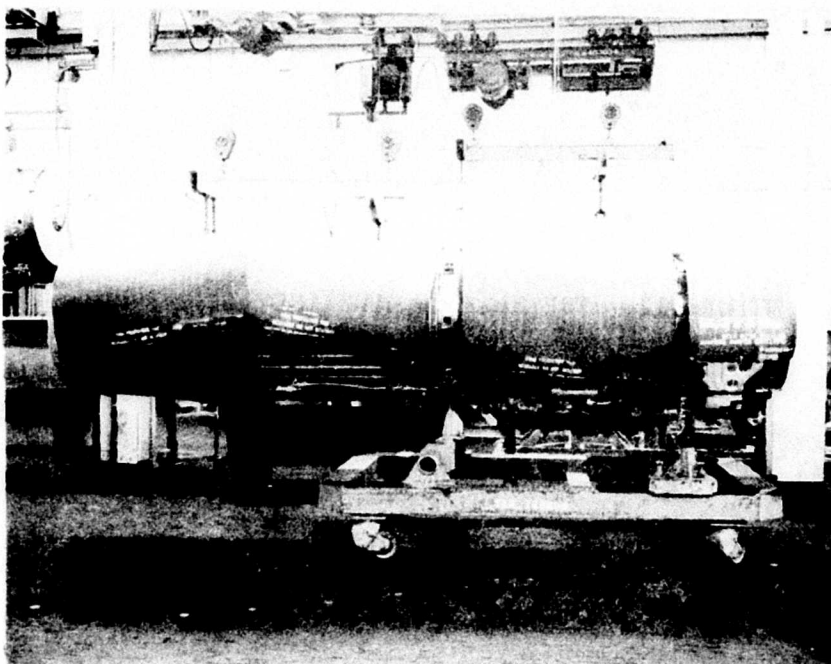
POLYETHYLENE FOAM SHEETS INSTALLED FOR PHYSICAL PROTECTION
